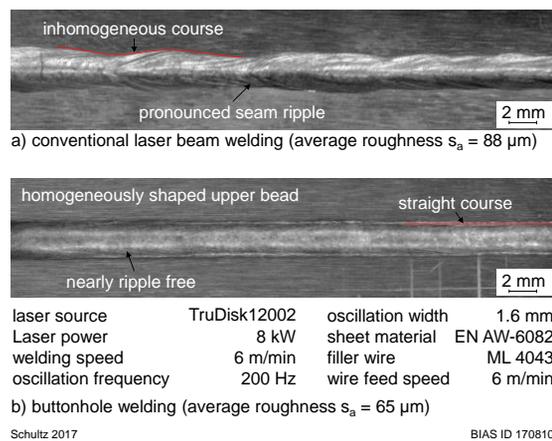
Comparison between a conventional laser beam welded seam and a seam welded by buttonhole welding
